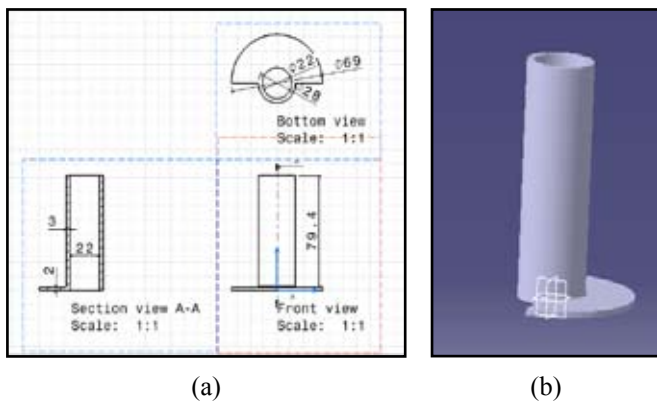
Piston Hole Open and Close Mechanism (a). Drafting, (b) CATIA Modeling
